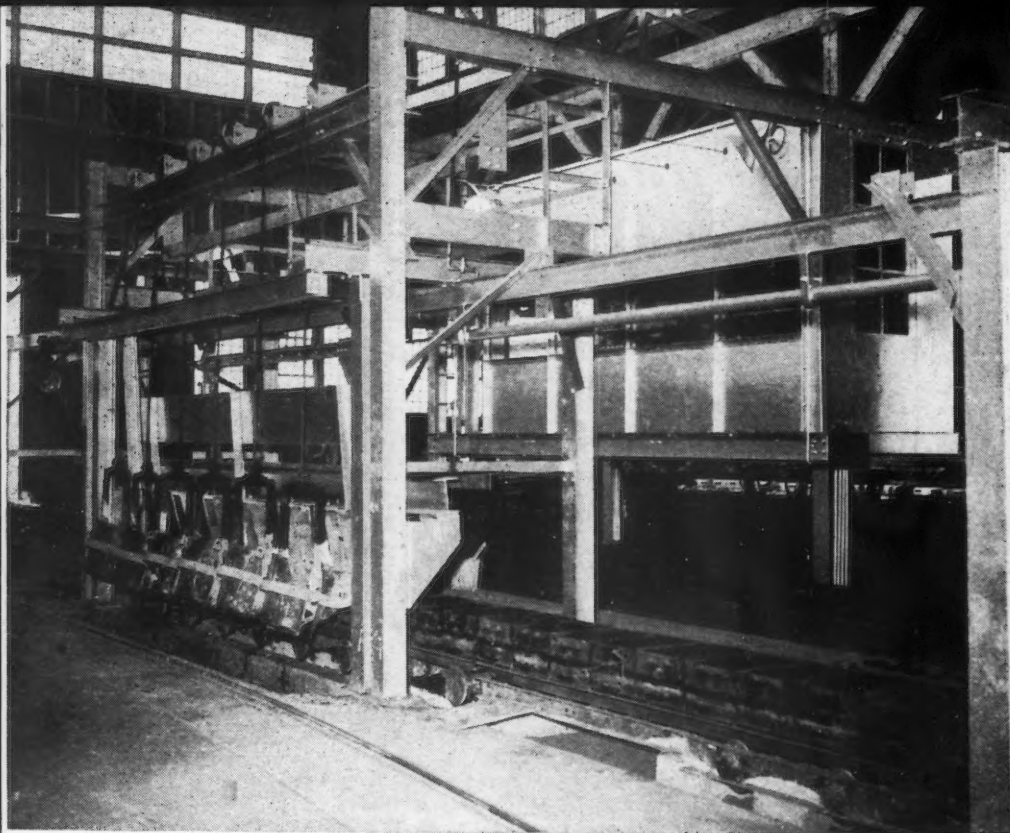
This view toward the rear of the ladles shows the power conveyors, pit and control room. The operator in the tower room controls the 500-lb ladles. Six ladles are poured into the molds simultaneously.
